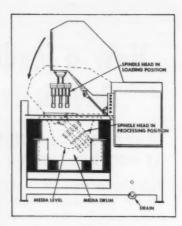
Diagram illustrating operation of machine shown in Fig. 1
